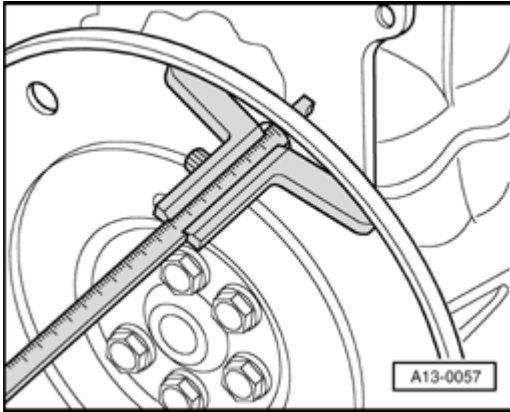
Checking Installation Position Of Drive Plate By Measuring At Three Points And Calculate Average
